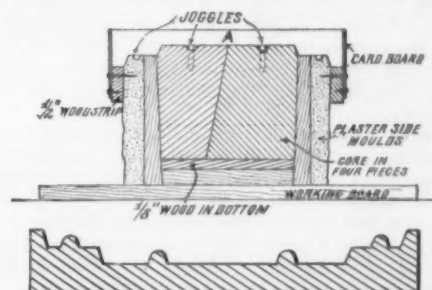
PARTS ASSEMBLED FOR CASTING THE PLASTER CASE, ALSO SECTION OF THE PLASTER CASE.
